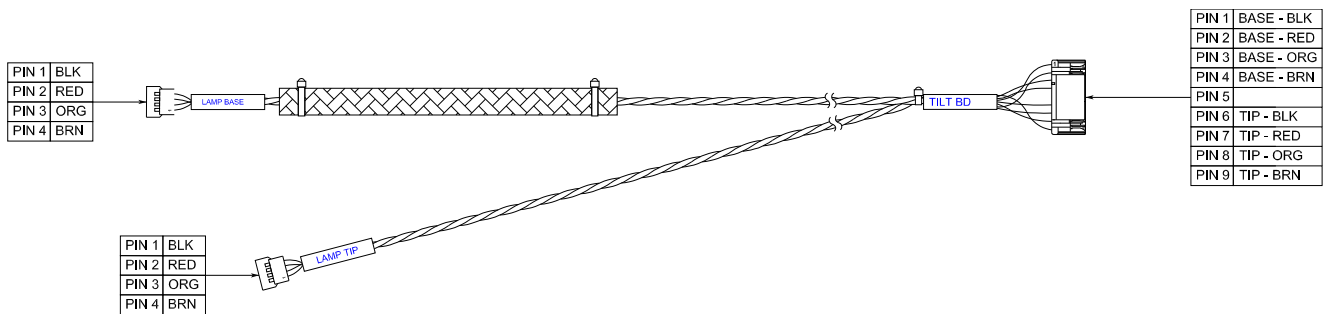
VL4000 Lamp Base & Tip Fan Extension Cable Assembly
